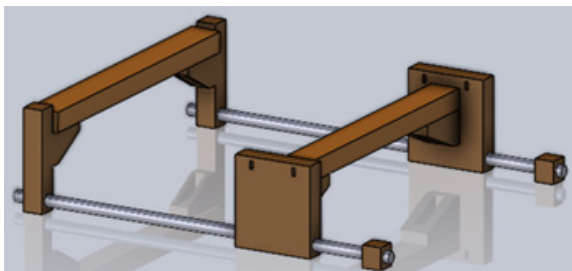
The shape of the support first part (3D, Frontal view and lateral view respectively).
